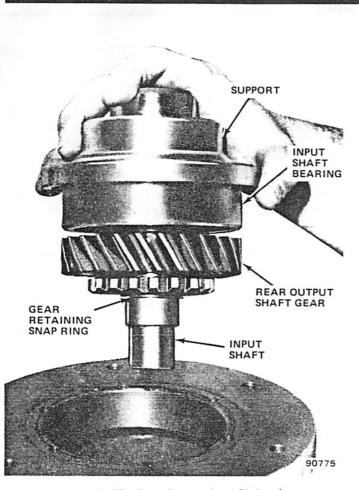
D-77 Front Support, Input Shaft and Rear Output Shaft Gear Removal/Installation
